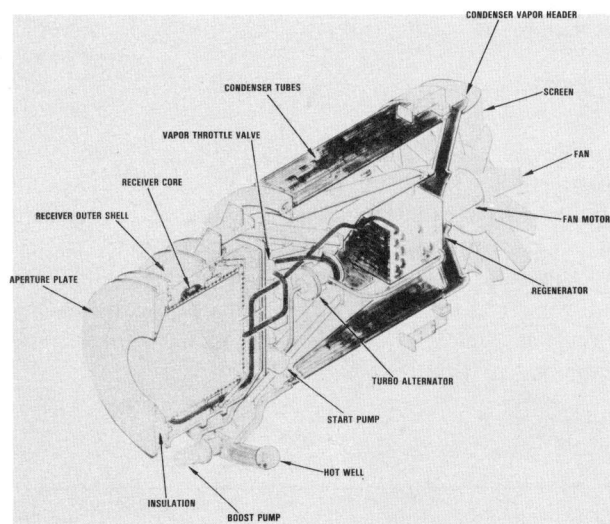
Cross Section of Power Conversion Assembly Showing Receiver, Alternator, and Organic Rankine Engine
